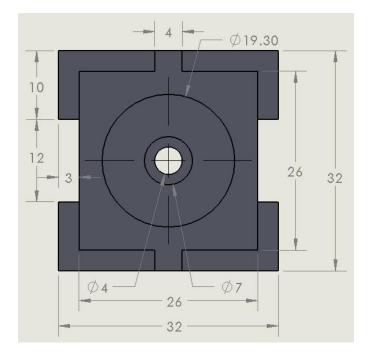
The top view of the slider. All values shown in this figure is in millimeters. The hole in the center is where the drill bit would exit and enter the bone. All measurements are in millimeters.
